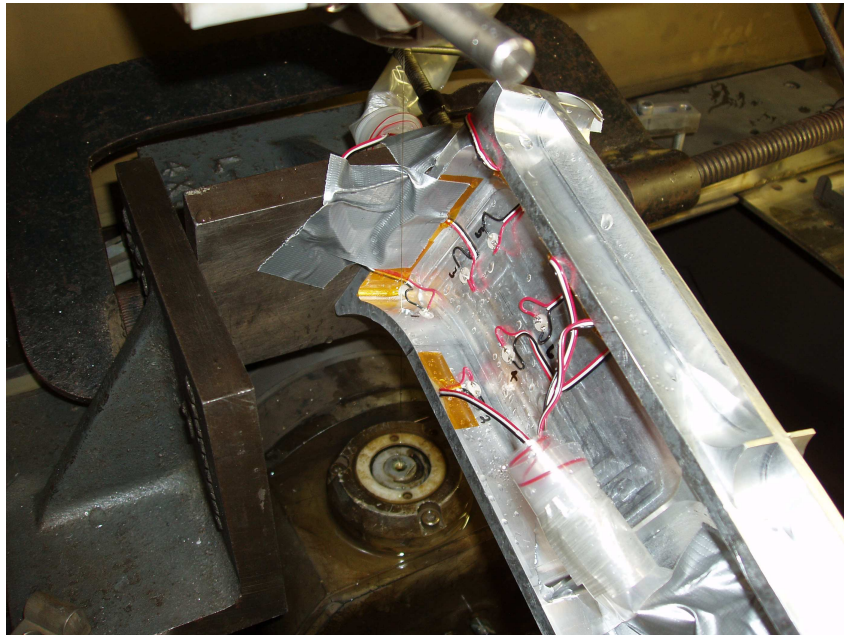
F-15: arrangement of F-15 specimen in EDM machine for first cut
